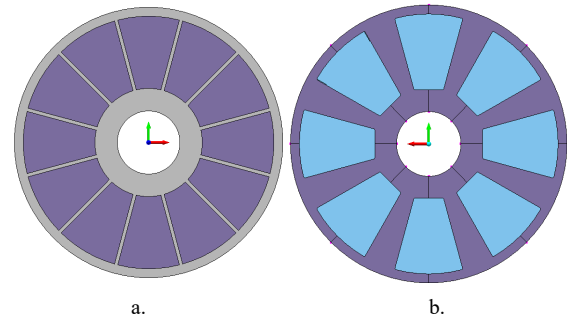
AFPM Generator 8 poles 12 slots, a. Stator, b. Rotor.
